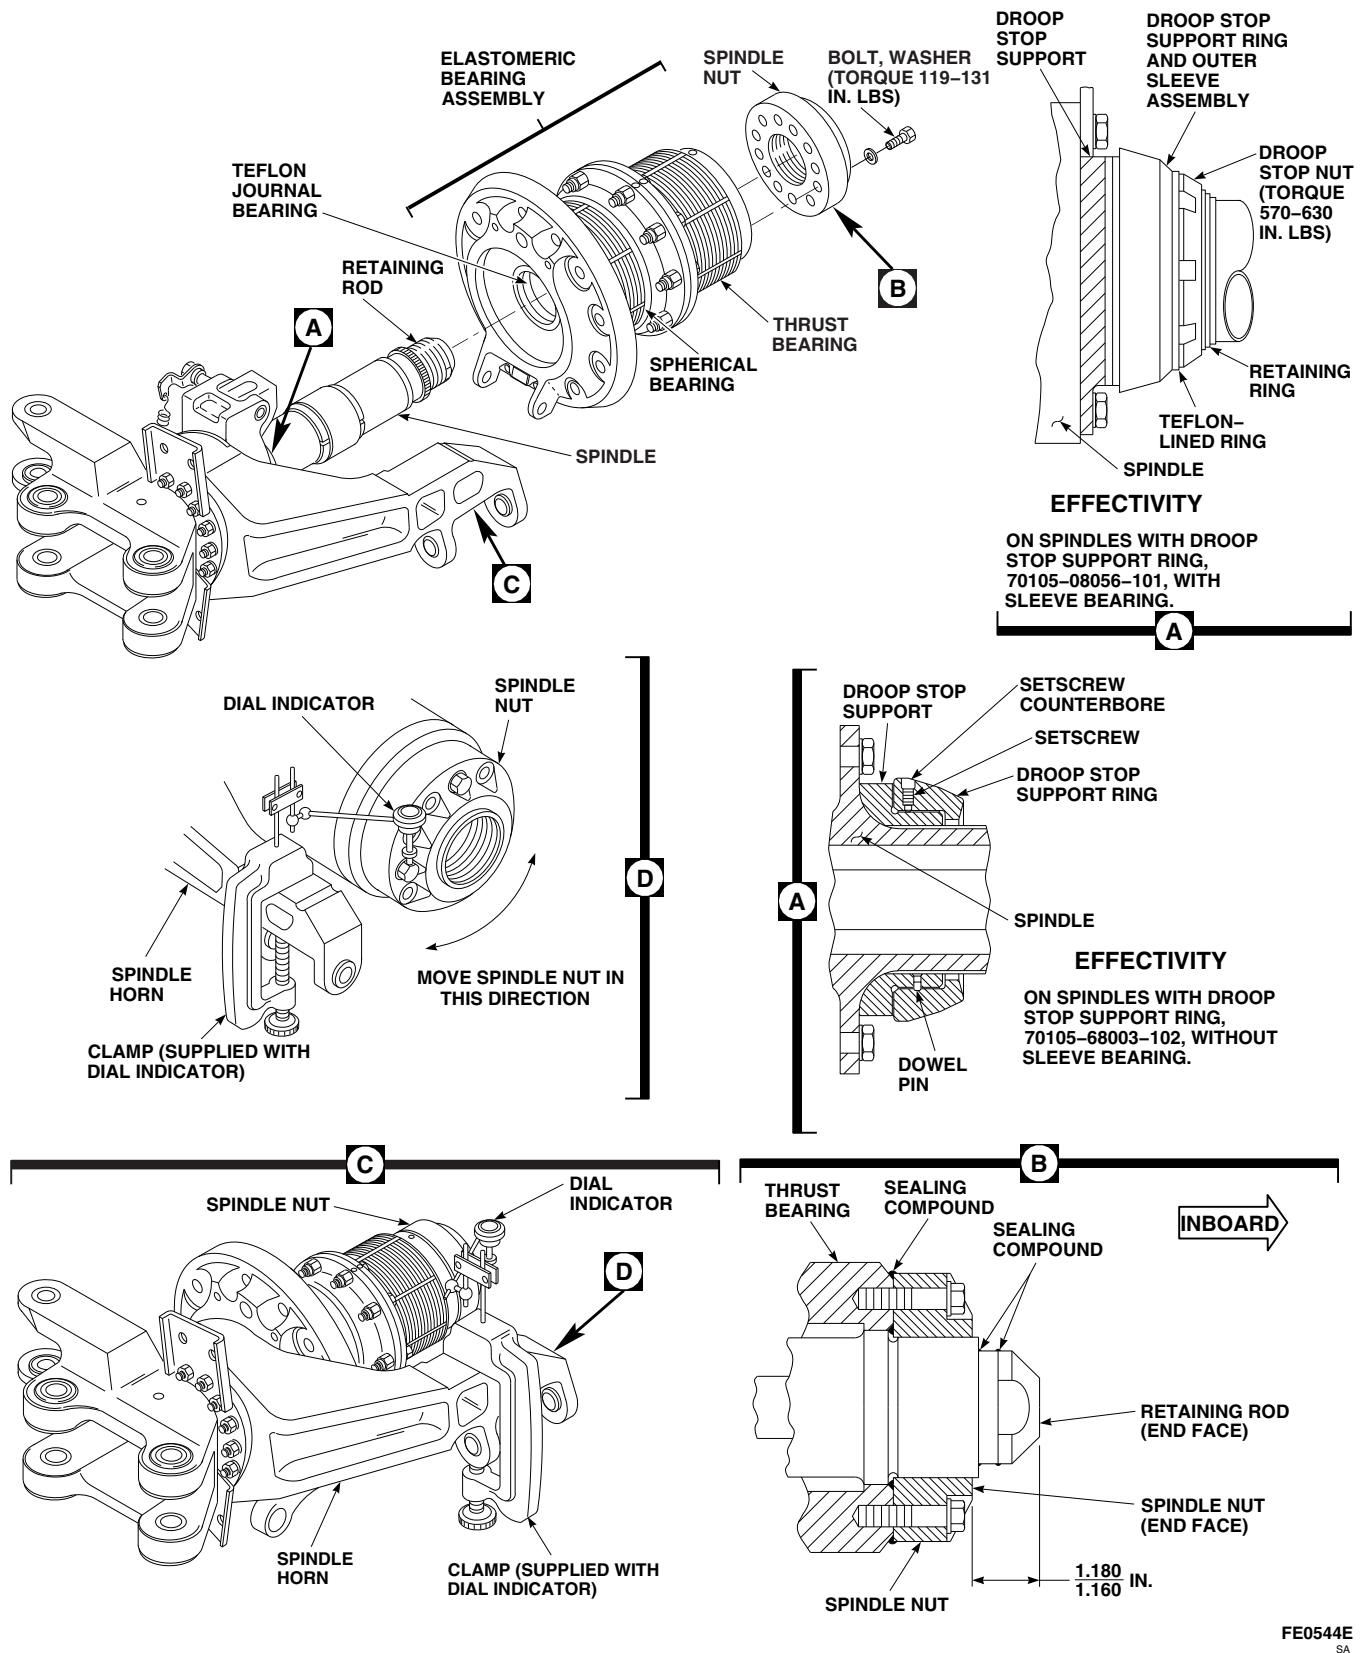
ASSEMBLE SPINDLE
